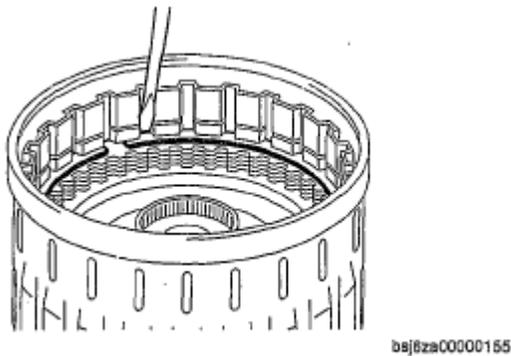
Removing Snap Ring (C2) From C2, C3 Clutch Drum
